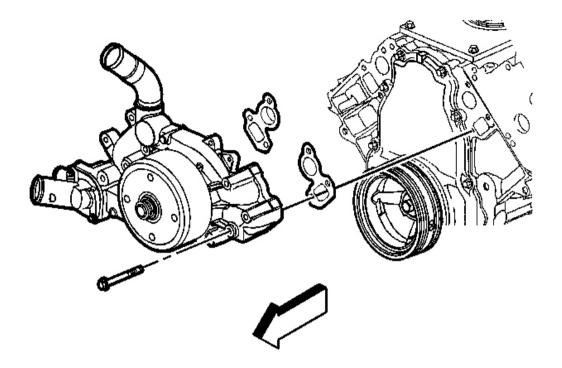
Water Pump & Bolt Courtesy of GENERAL MOTORS CORP.
